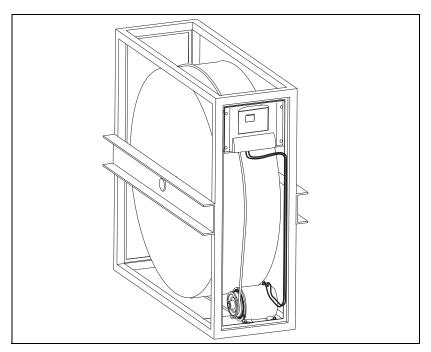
EMX-B motor and control unit mounted on rotary heat exchanger
